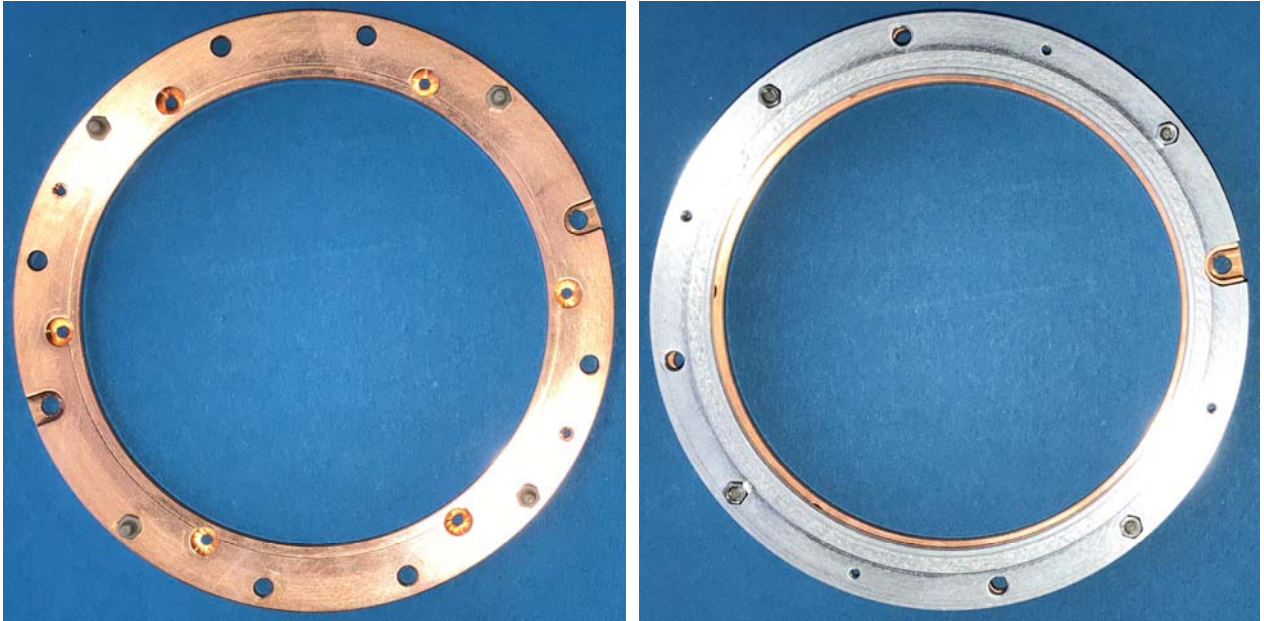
(above) shows typical mounting provisions in the front ring (screws in the front ring must be placed before MCP stack assembly)*. If a wMesh40/80 is mounted in this way the distance between biased parts is 1 mm to 3 mm, depending on the employed PEEK M2 screws and nuts/washers. Larger distances can be achieved via M3 screws.
